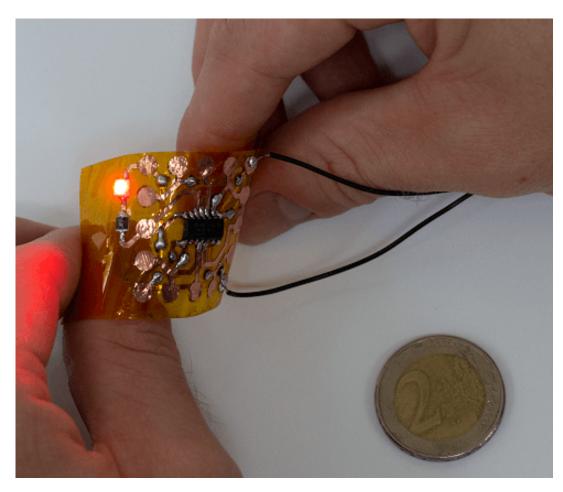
Full working flexible PCB programmed with a basic "blink" code.
